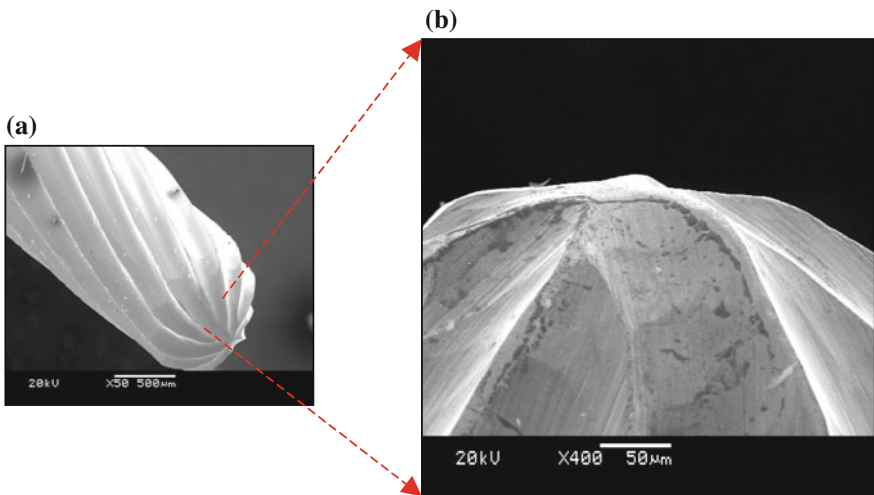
a Laboratory used WC-Co surgical tool; b laboratory used WC-Co surgical tool before surface treatment
